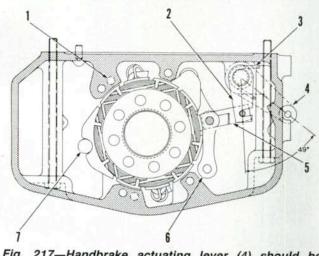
Handbrake actuating lever (4) should be positioned at approximately 49 degree angle as shown when linkage is correctly installed
